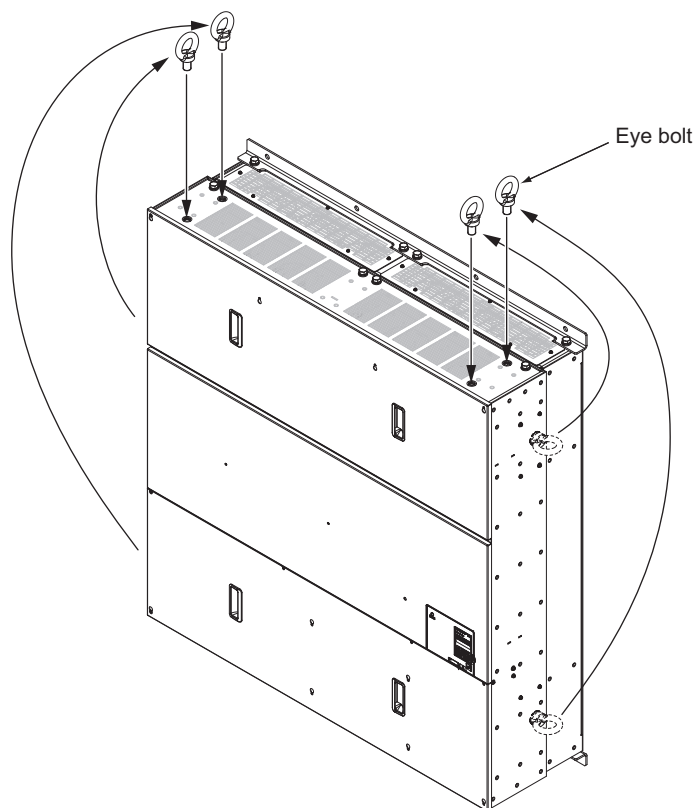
Location of Eye Bolts (CIMR-A□4A0930, 4A1200)
